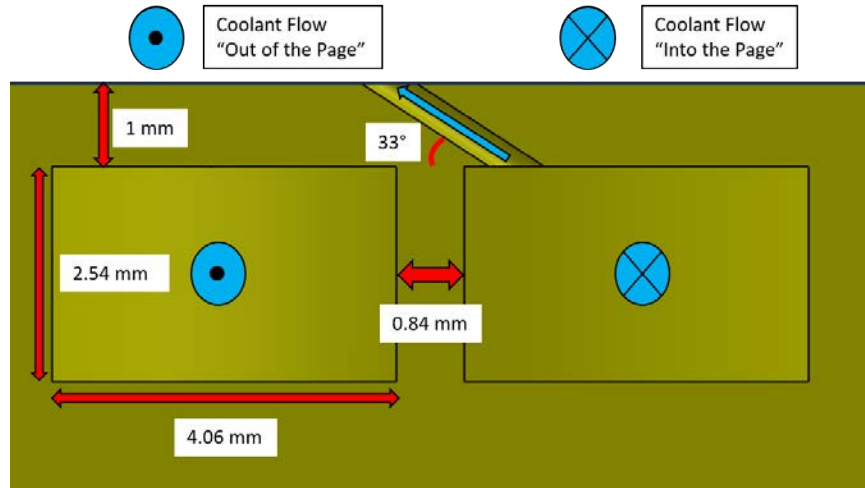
Section view of the internal coolant channel with the dimensions of the channel and coolant flow labeled.
